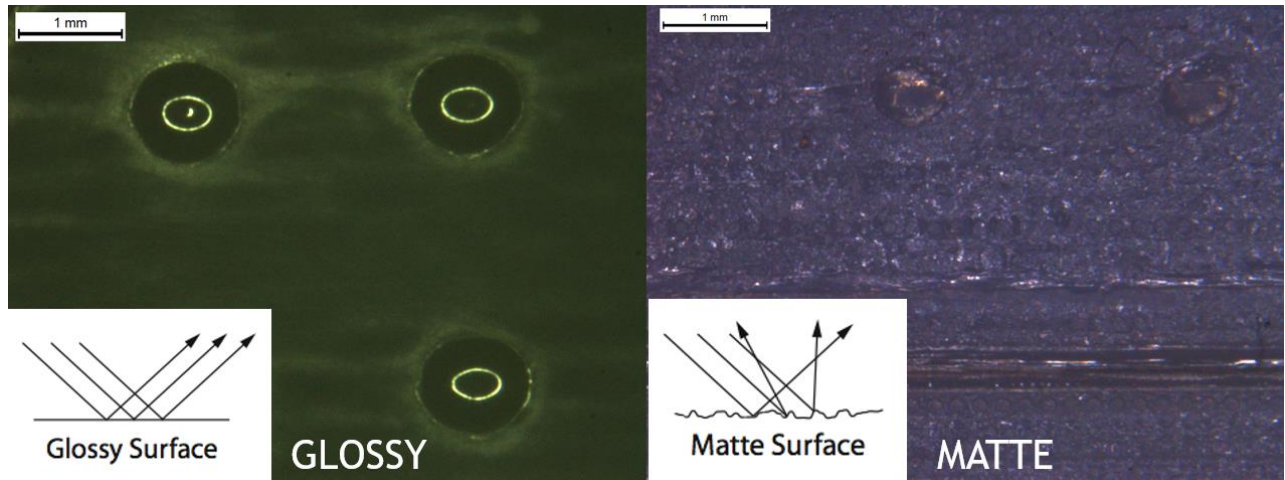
The picture shows the internal part of the separation chamber for one Matte and Glossy surface finished prototypes. The Matte surface finished is full of microdefects.
